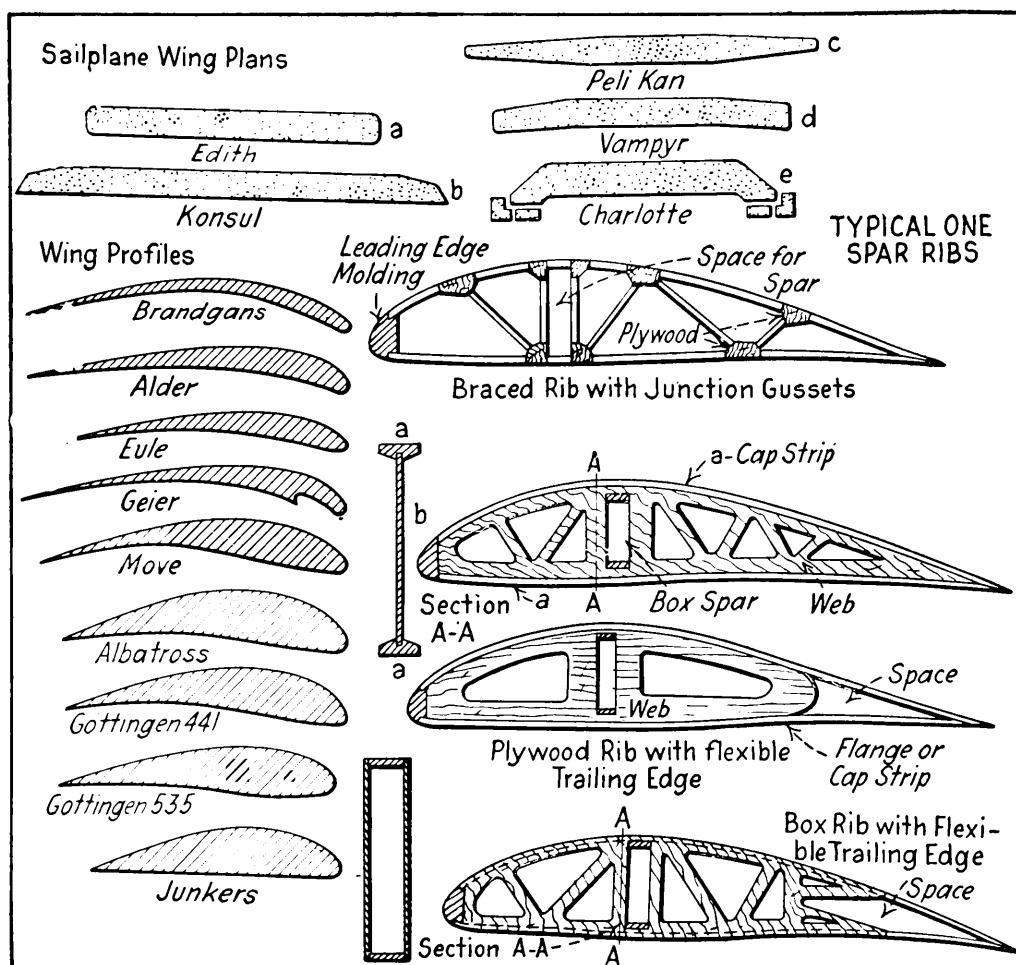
Diagrams Showing Sailplane Wing Planes and Airfoil Sections, Also the Construction of Typical One Spar Ribs of the Warren Truss Braced Type and of the Plywood Web Form With Cut-outs and With and Without Flexible Trailing Edges.
